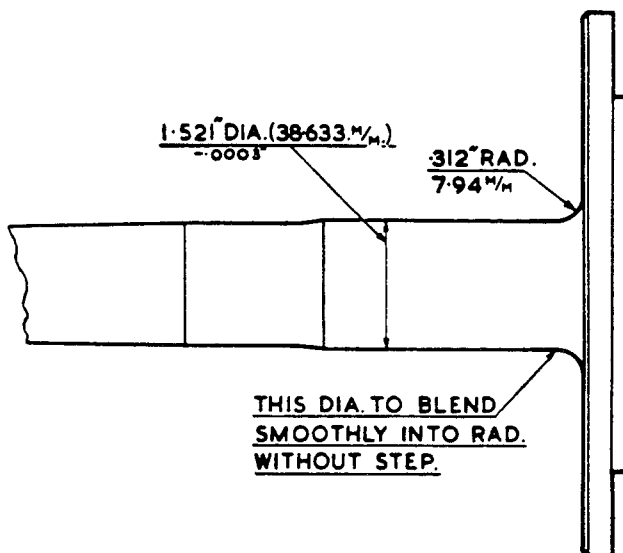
SECTION-REAR AXLE SHAFT SHOWING GRINDING DIMENSION.
